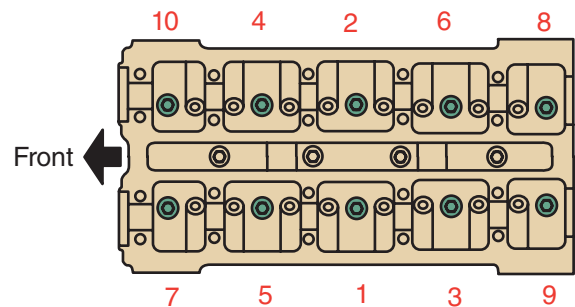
Always follow the specified tightening sequence when torquing cylinder head bolts.
